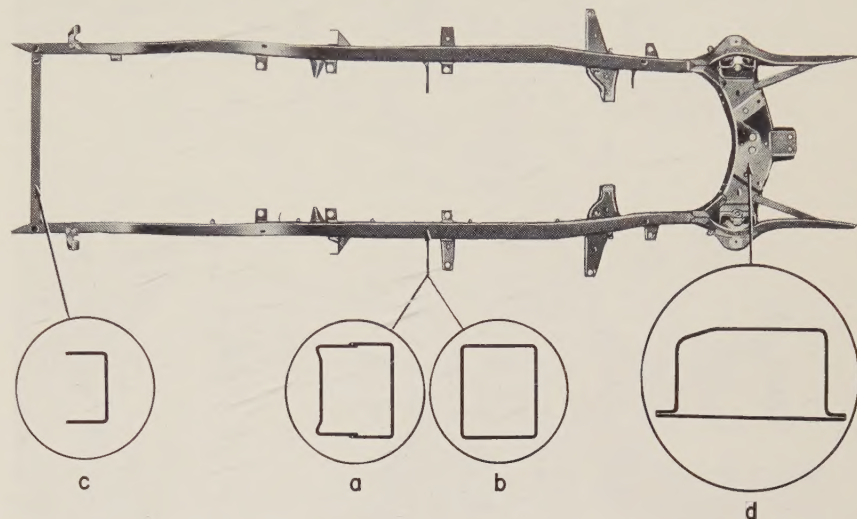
The manufacturing methods used to produce the 1955 Chevrolet passenger car rectangular frame side rails were a departure from conventional methods. The conventional method for producing a rectangular rail consisted of using two overlapping channels which were joined by submerged arc welding (a). The method now used consists of first forming a circular tube in a tube mill. This tube is then resistance seam welded and passed through a "turks head" where a rectangular rail of the desired dimensions is produced (b). The frame's rear and front cross members (c and d) are manually arc welded to the side rails.
